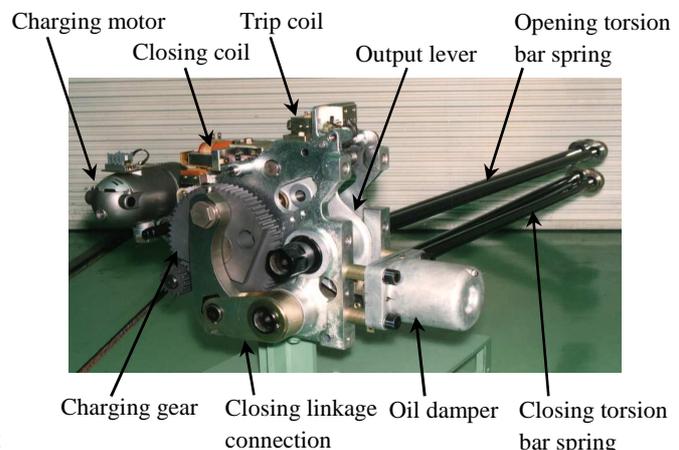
Layout of torsion bar spring operating mechanism for 245 kV GO GCB
